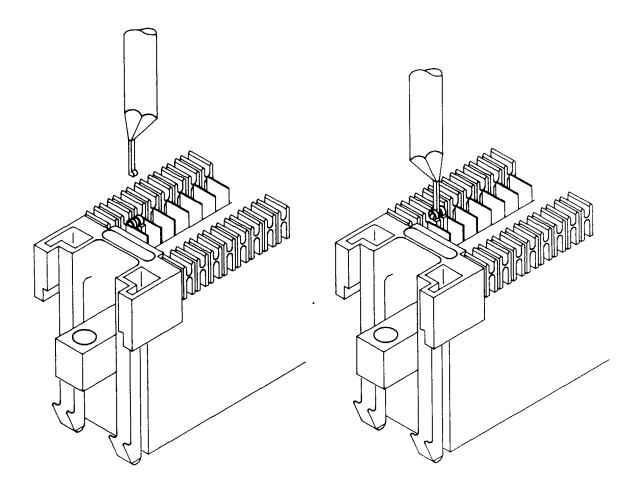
Removing Damaged Contacts From the 645042 Amp Connector With the R-4858 (Amp No. 266187-1) Repair Tool
